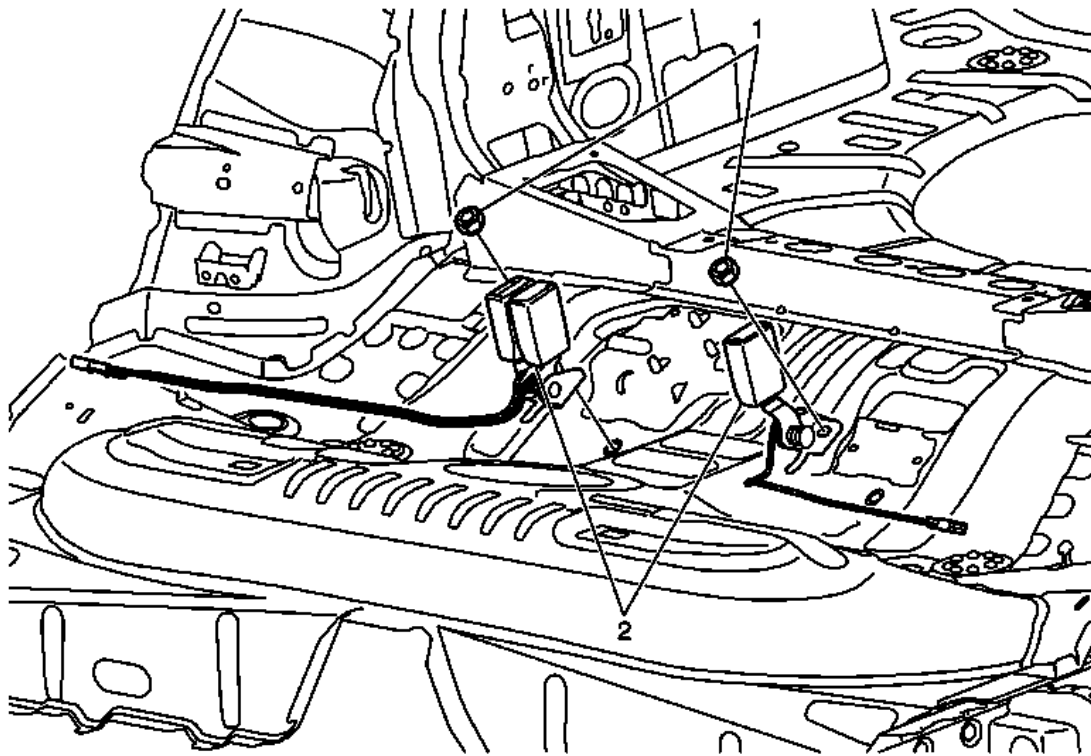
Rear Seat Center Shoulder Belt Buckle & Fastener
